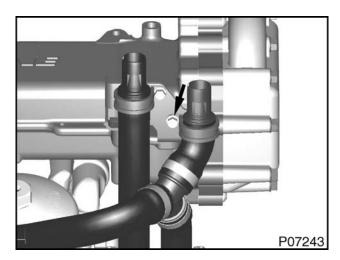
Charge Air Cooler (CAC) supply coolant pipe to bracket connection
